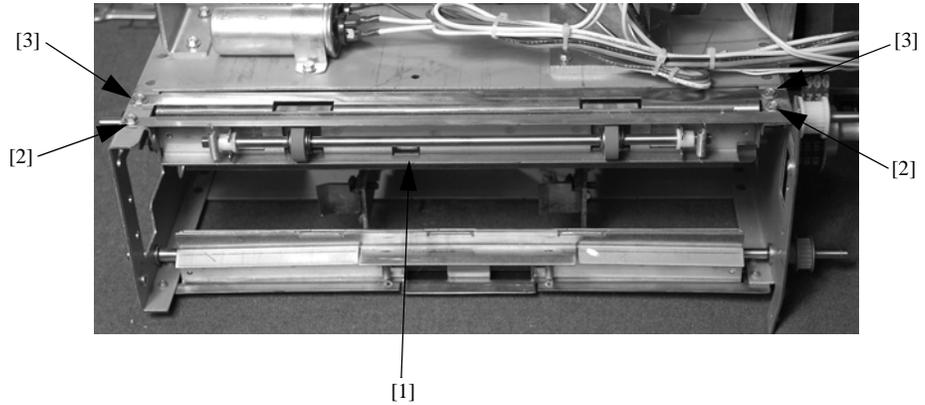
Punch Entrance Drive Roller Assemblies.
